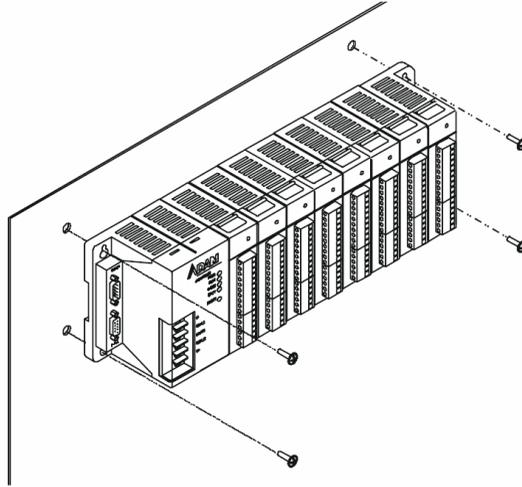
Panel mounting screw placement for 8-slot models (ADAM-5510EKW and ADAM-5510EKW/TP)
